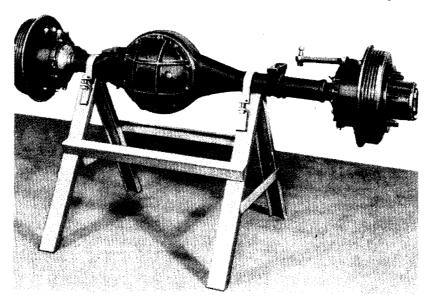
Banjo Type Front Axle Assembly Mounted in Axle Stand
